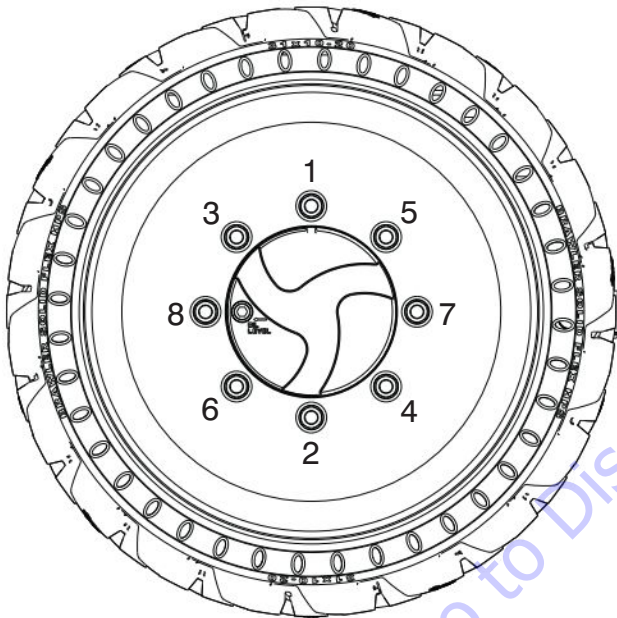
Diagram 5-4. Wheel Fastener Tightening Sequence
